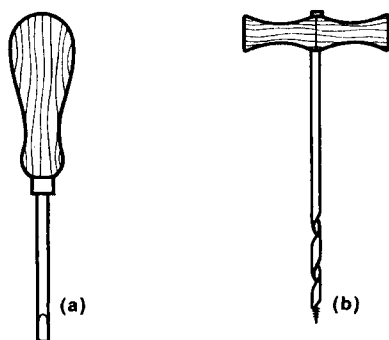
(a) Bradawl for making small holes for screws and nails.
